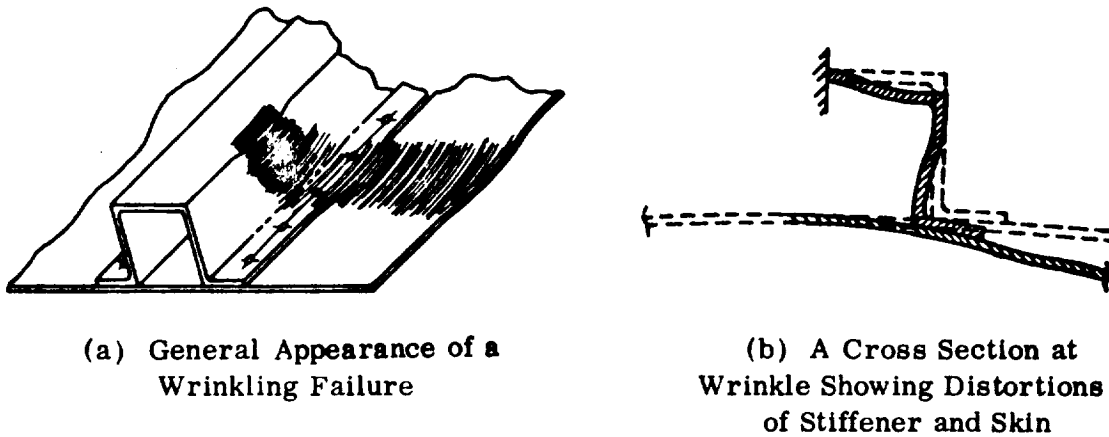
TYPICAL PANEL WRINKLING FAILURE.
